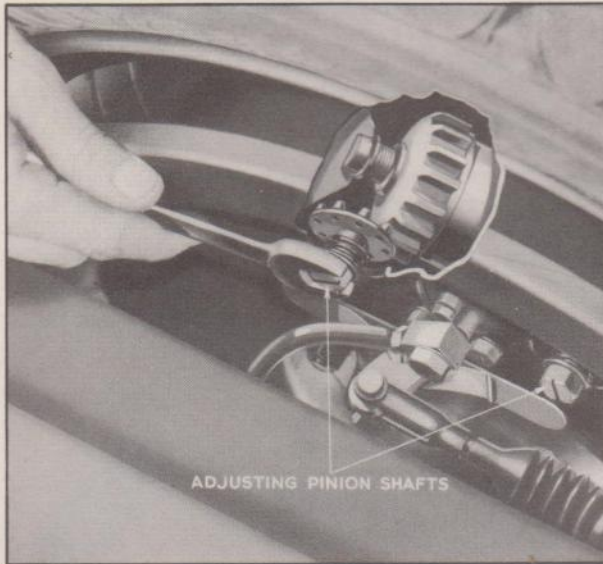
Adjusting 1½-Ton Truck Rear Brakes
